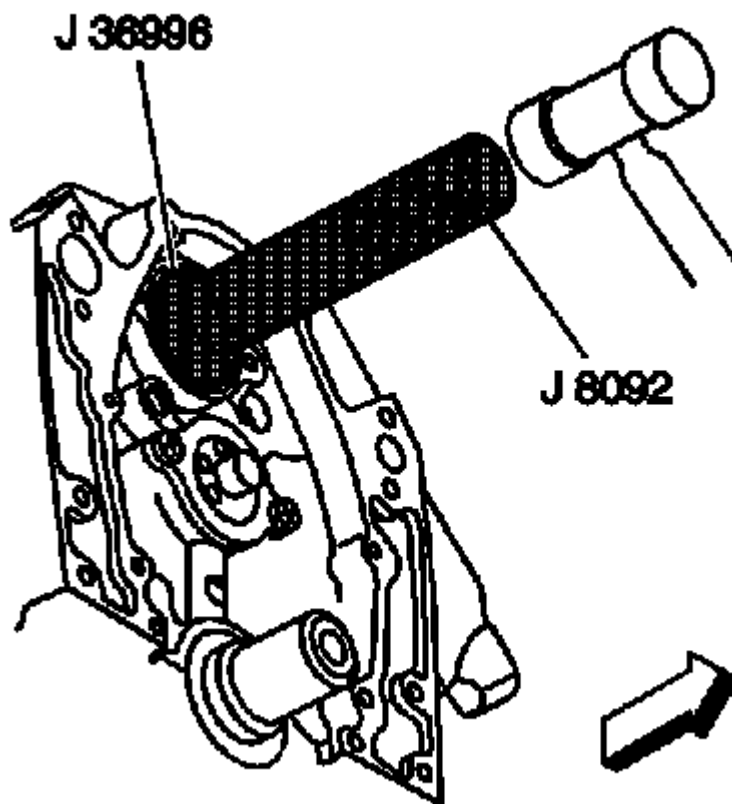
View Of Balance Shaft & Special Tool J 36996
